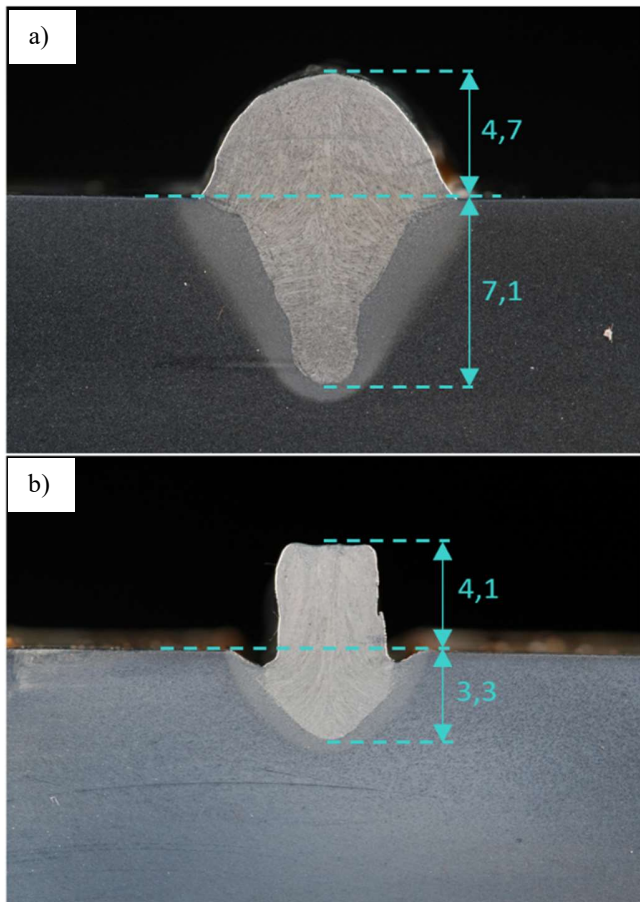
Macrographs, (a) Weld bead D1, $V_s = 0.6$ m/min; (b) Weld bead D12, $V_s = 1.7$ m/min
